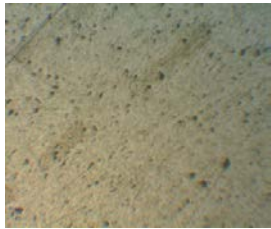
The macrographs of all Aluminum alloy Friction stir weldments
